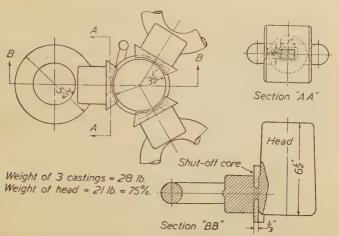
Moulding Drawing for Castings to be fed through Small Runners.
